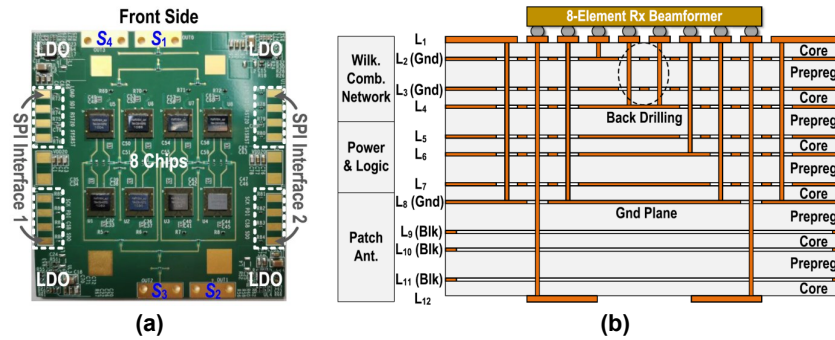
(a) PCB photograph of the 8-chips 64-element four-beam phased-array receiver module in [3]. (b) PCB stack up.
